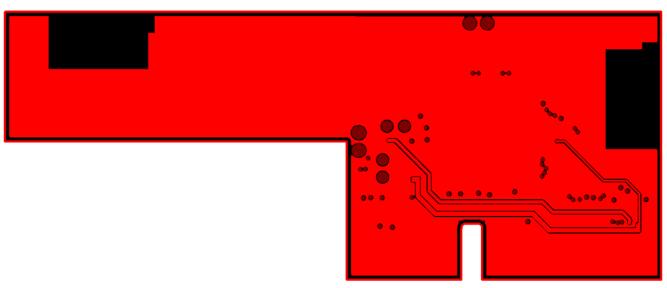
WL1837MODCOM8I Layer 3 Layout
